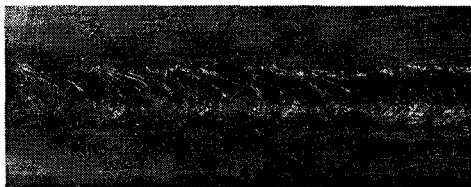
Hybrid welding of vertical position with V groove
